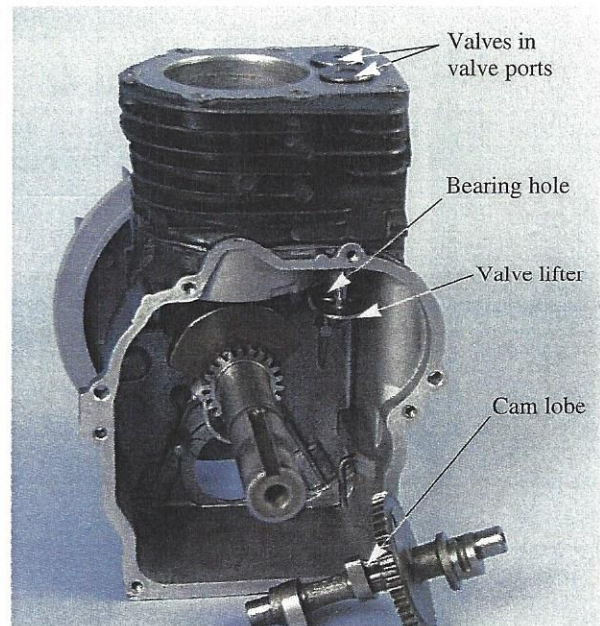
Cam lobes are located directly under valve lifters. Camshaft turns in lubricated bearing holes.
